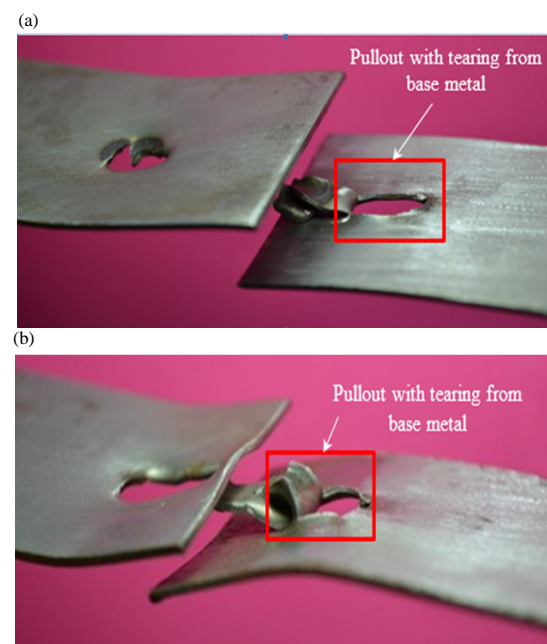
Pullout failure mode: a) RSW PIT samples and b) RSW LBIT
